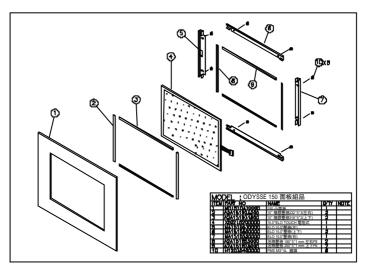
ODYSSE 150 FRONT BEZEL ASSEMBLY
